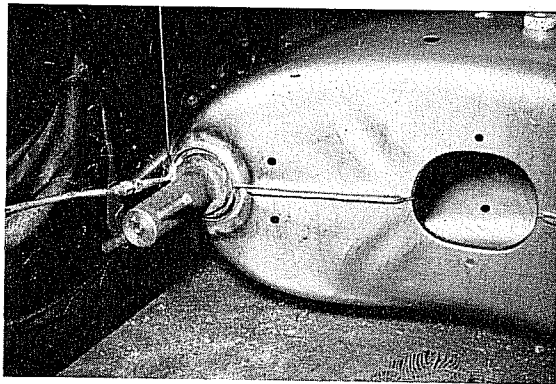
(right).—Gas-welding operations on jigged body pressings
